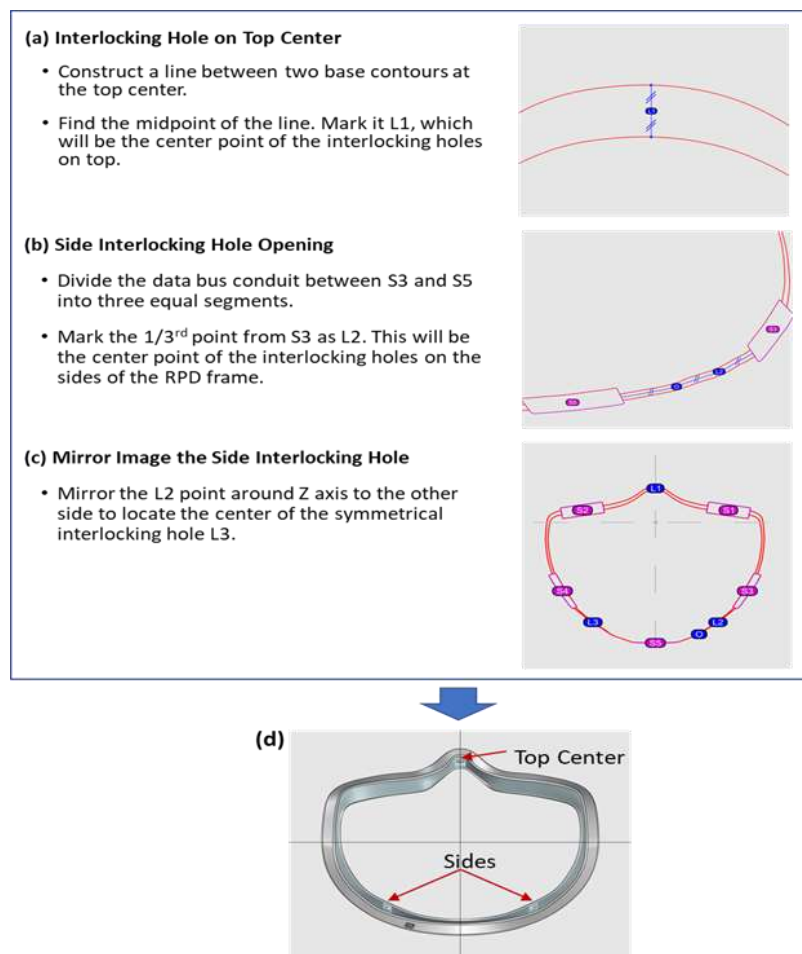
Determining the locations of the interlocking mechanisms. (a) Top Center opening (b) Side opening. (c) All three openings (d) Openings in the digital prototype.
